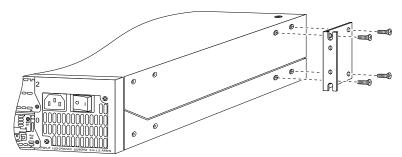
Cisco 3640 23-Inch or 24-Inch Bracket Attachment—Rear Panel Forward
